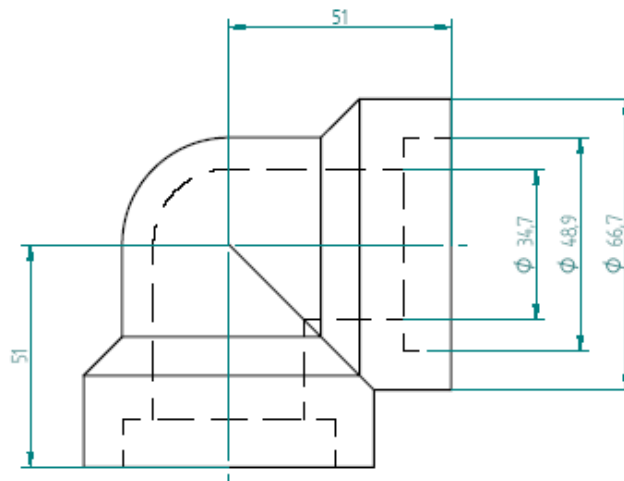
A dimension of a 90-degree socket welding elbow
